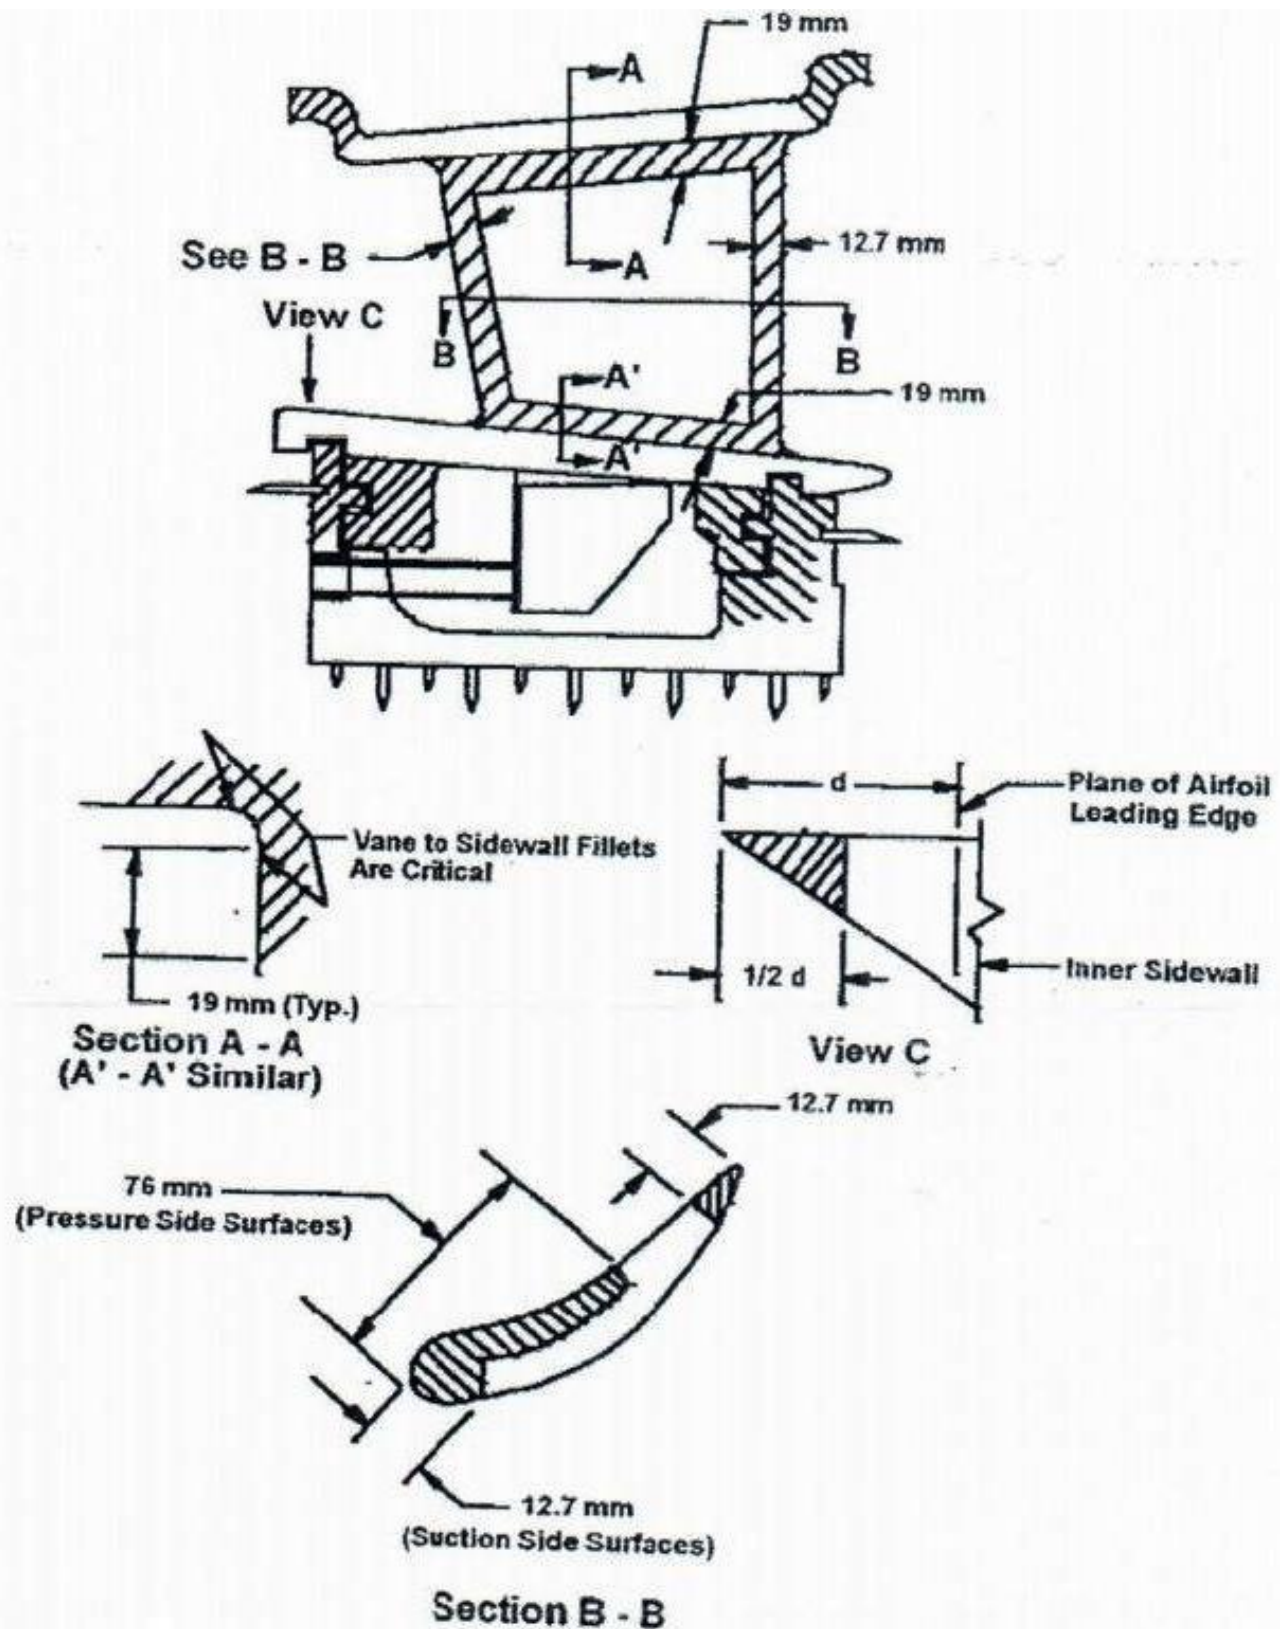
Second Stage Turbine Nozzle Dimensional Inspection Form
